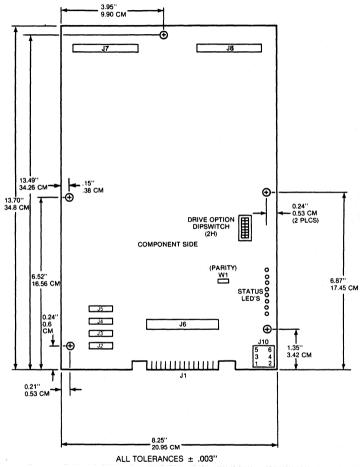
SA1403D DIMENSIONAL DRAWING
